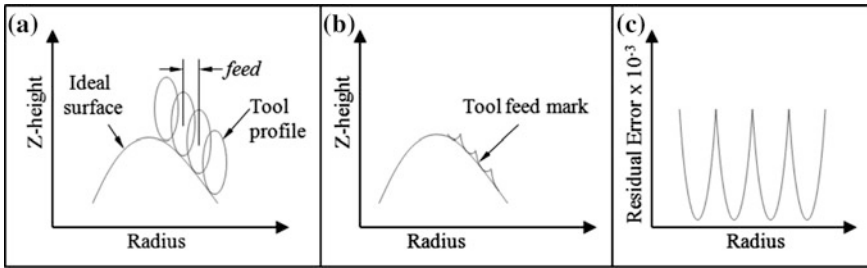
Cutting residual error of a machined freeform surface; a Tool profiles on ideal surface, b resulted tool feed marks on machined surface, and c resulted cutting residual errors due to the errors from feed marks
